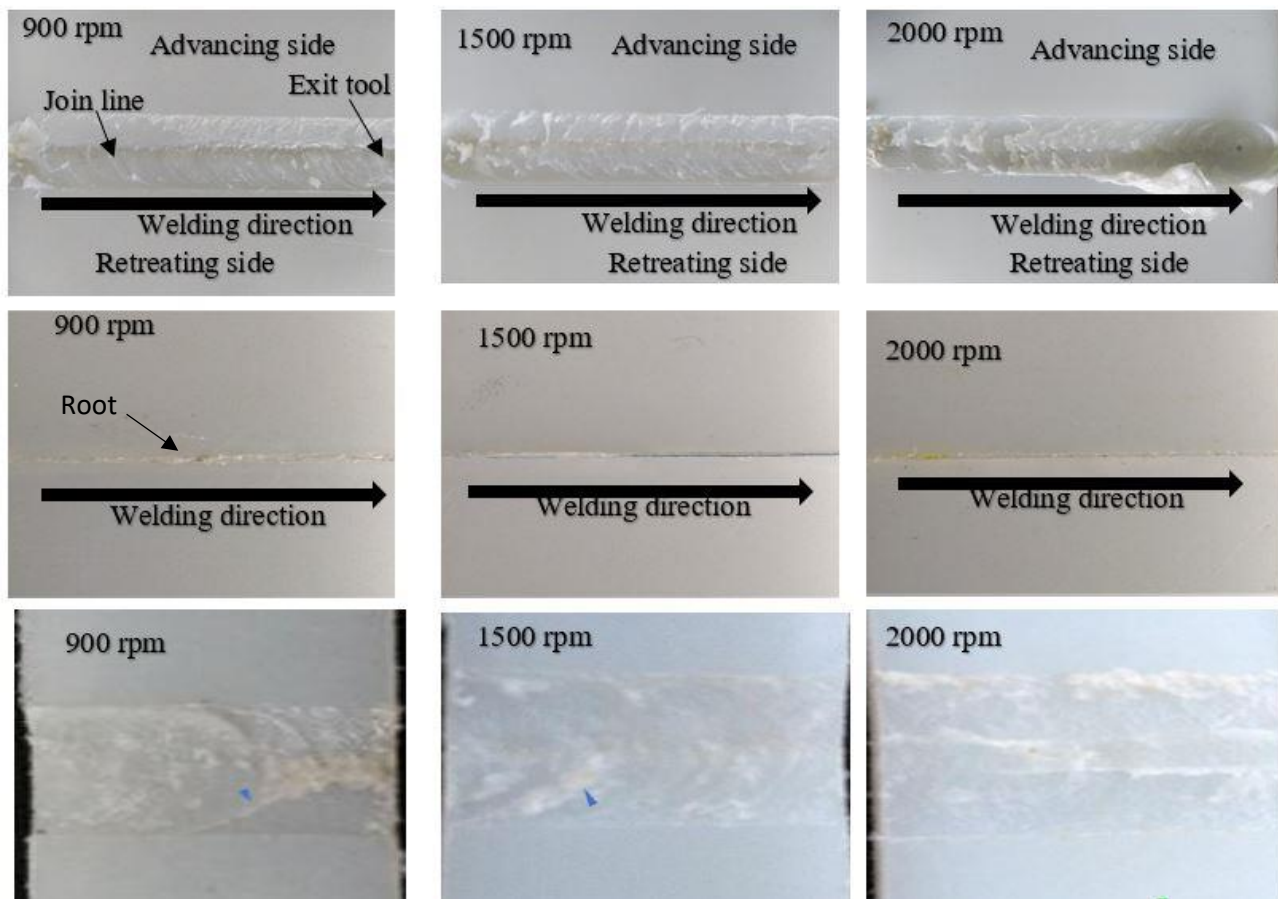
FSW welding results for welding on one side, weld surface (top), bottom weld surface (middle), and bottom weld surface after double side welding (bottom)
